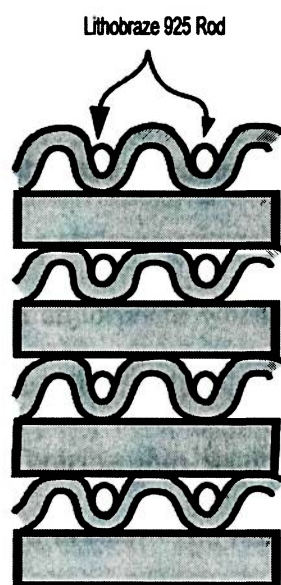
shows the wavy shape of wire mesh after cleaning and crimping. It is considered to be corrugated shape owing to its geometry. With this method, an essentially 2-D shape (wire mesh) has taken on 3-D dimensions. Each sheet of mesh listed in Table 3 was subjected to this procedure prior to laminating and bonding. Sample A and B have 10 ply thickness. Sample C, D, E, F, G, and H have 20 ply thickness.
